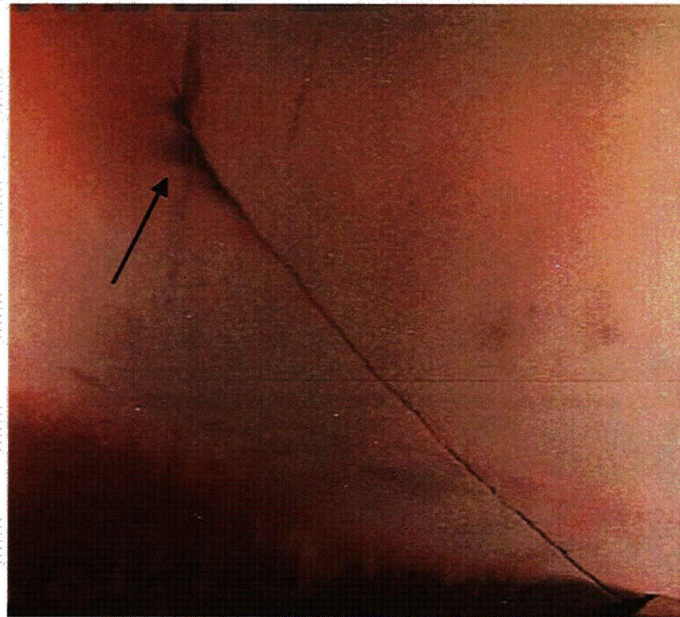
Mechanical Fatigue Crack with Black Oxide Decorating One End of Crack
